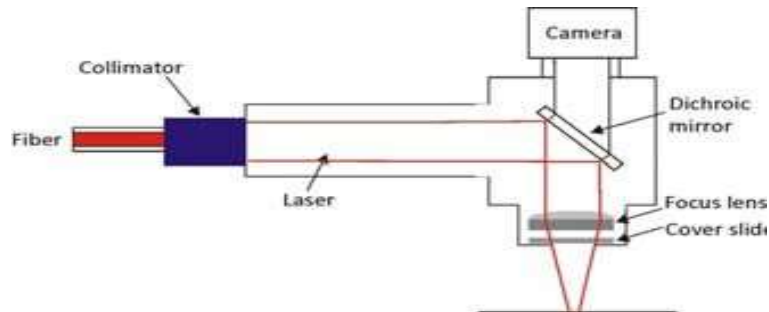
Co-axial view of laser welding process using a dichroic mirror [49].
